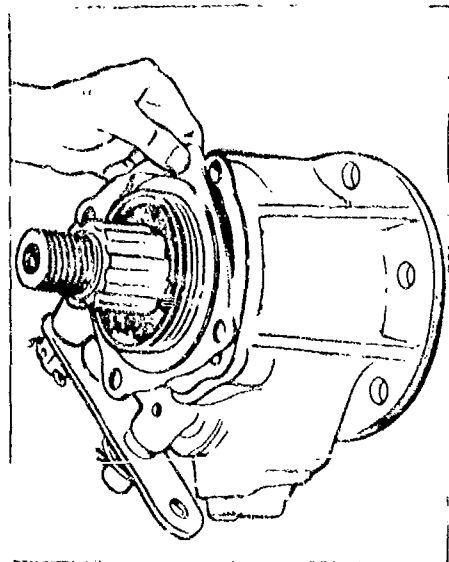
Adjustment of tension on the front axle power shaft bearings
